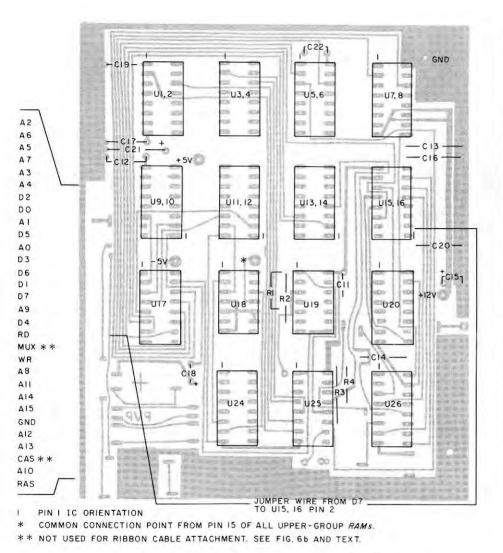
Memory board parts placement and external connections. See Fig. 6b for U27 placement. Drill a 5/16-inch hole at the + location to allow passage of a keyboard housing post through the board. The large donut in the lower right corner denotes a board attachment site if the 32K mod will not be housed in the keyboard cabinet. Note that pin 1 orientation of ICs U9-U16 is opposite to that of the other ICs.
